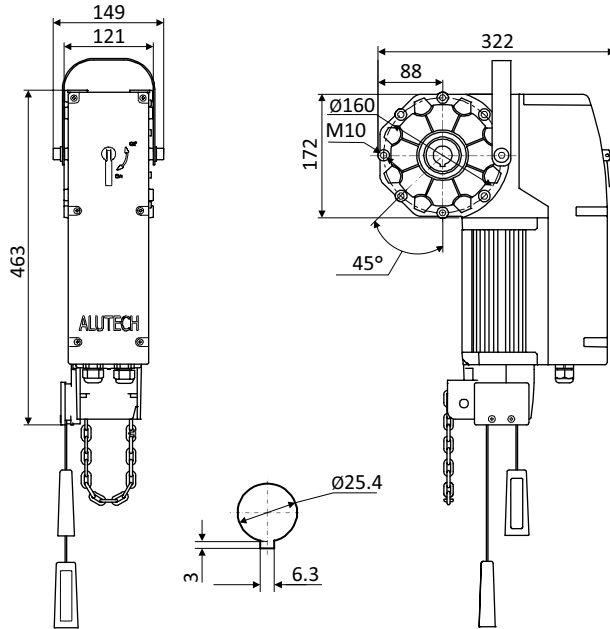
Dimensions of TR-10024-400 and TR-13018-400 drives
